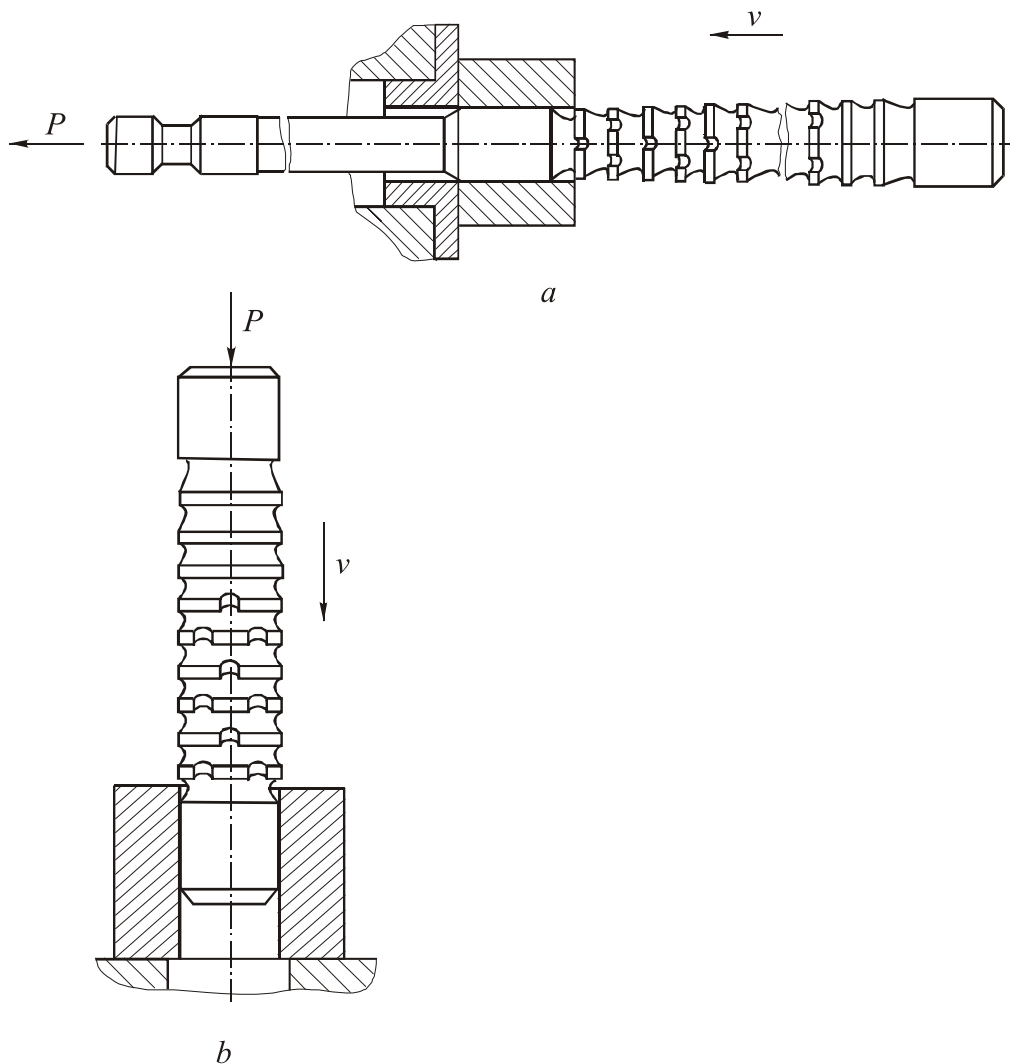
Broaching types: (a) pull broaching (b) push broaching
